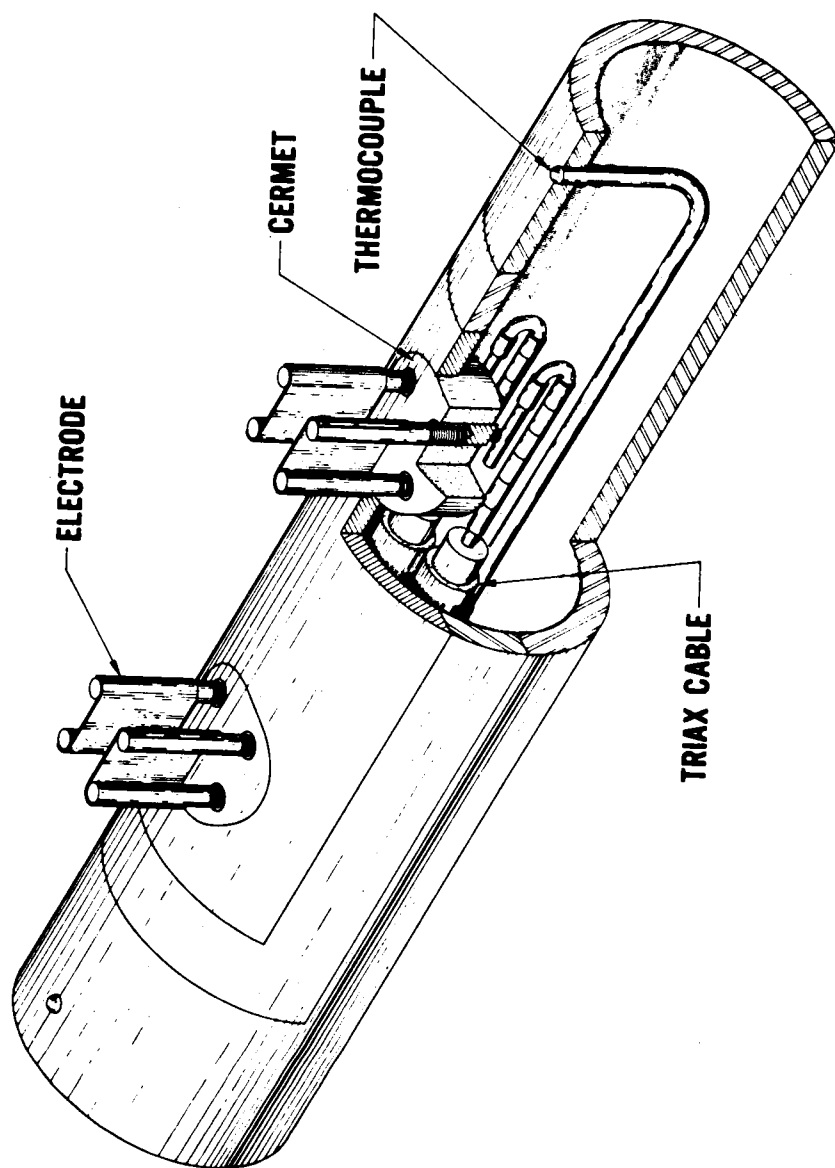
In-Core Guide Tube Impedance Measurement Assembly Flag Probe Sensor.
